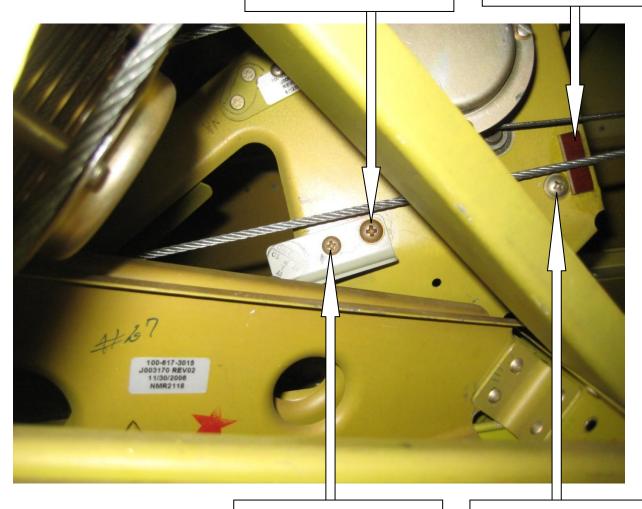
General location of elevator down spring (refer to drawing 1004690) Looking aft from rear passenger cabin with aft cabin bulkhead removed
